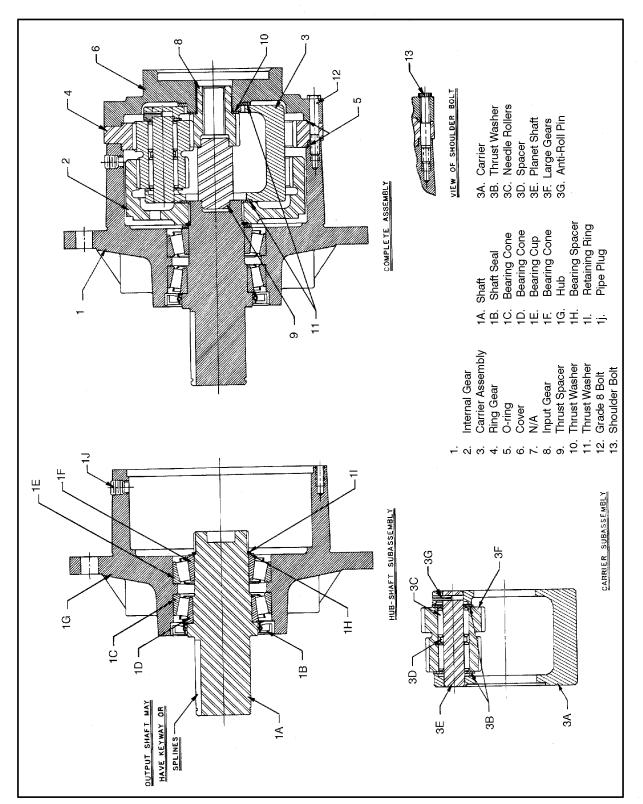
Swing Drive Hub (Fairfield) (S/N 030068040 to S/N 0300183033)
